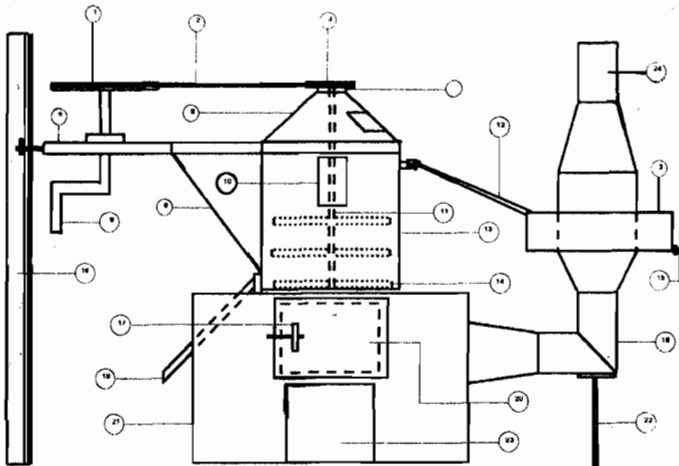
A Perspective view of the Hot-water Oil Extractor
